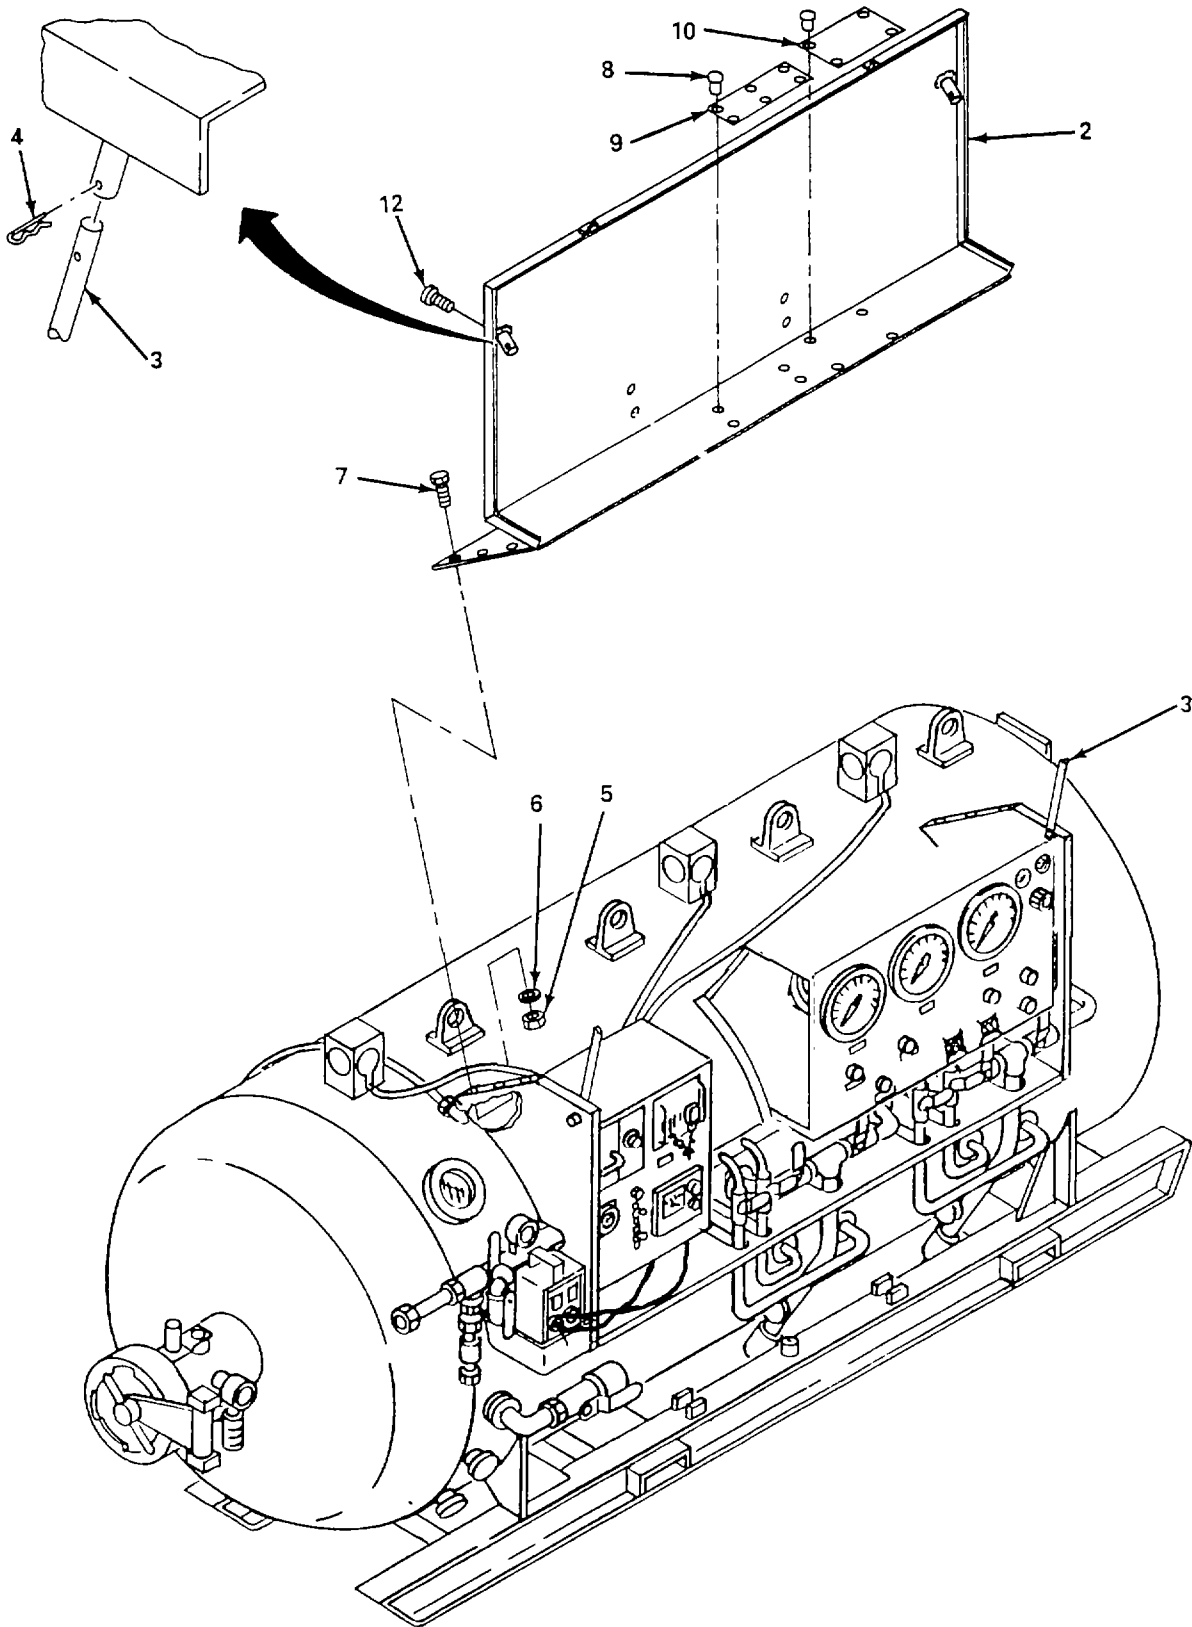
Chamber Instrument Panel and Hood Assembly Enclosure, Replace (Sheet 1 of 2).
